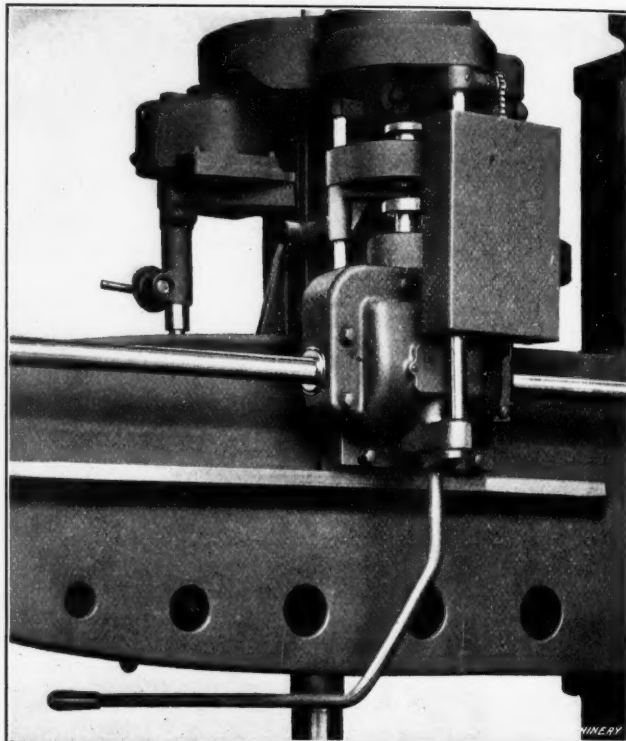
Rear View of Head showing Third Bearing on the Arm
